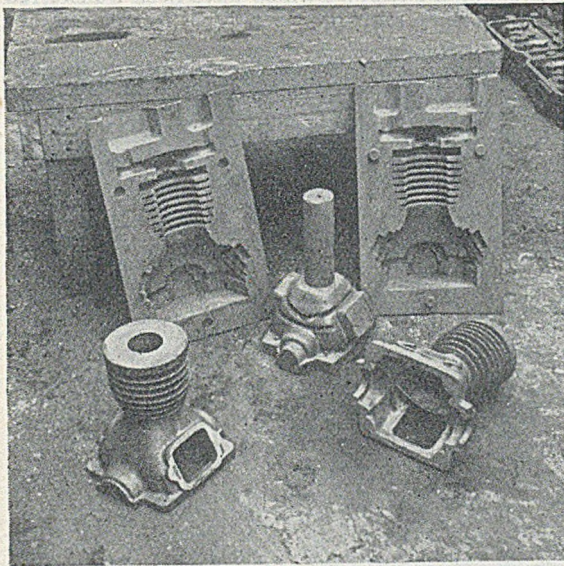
Finished Shells, Castings and Core for the Job illustrated in Fig. 6. The Casting weighs 28 lb., is 10½ in. high and 9 in. wide.
